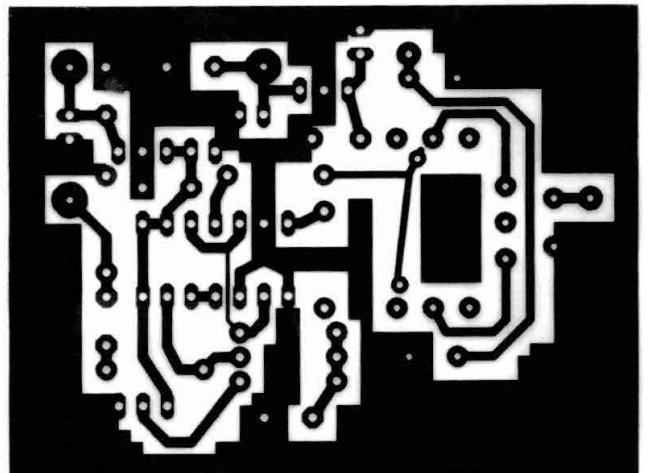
H-mode mixer PC board mirrored solder-side etching pattern. The finished board should be 65x50 mm.
